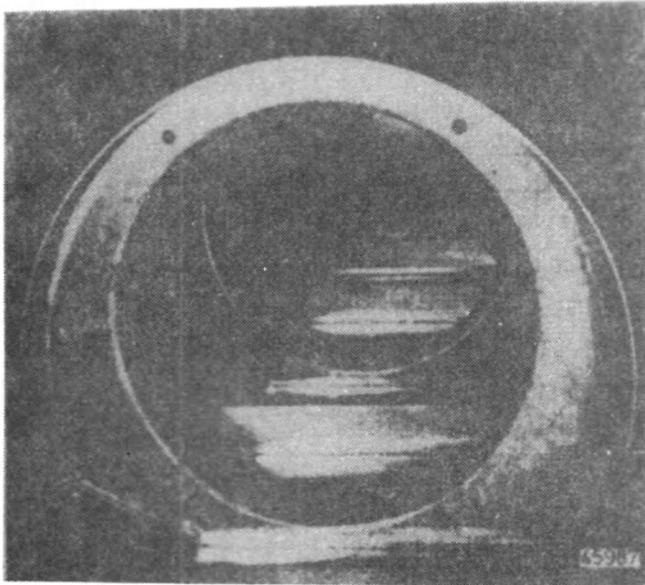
Laser welded missile section of 2.5mm thick stainless steel
